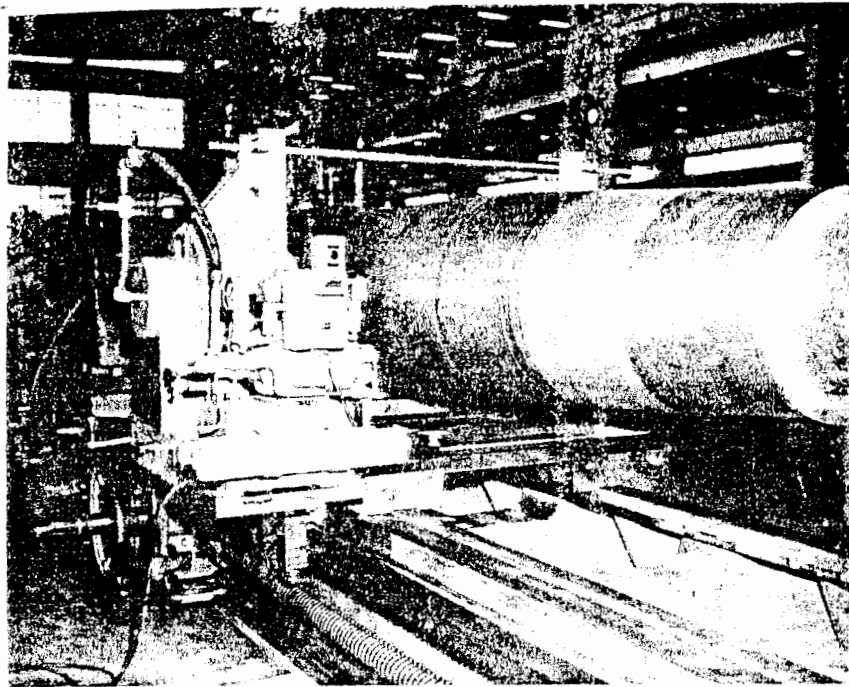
BETHLEHEM ROLLING EQUIPMENT SHOWN ROLLING A PROPELLER SHAFT FOR THE AIRCRAFT CARRIER KITTYHAWK (CVA 64) - "HARDENING" ROLLER ON NEAR SIDE.
